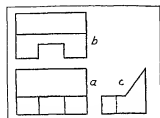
FRONT, TOP, AND RIGHT SIDE VIEWS OF BLOCK
